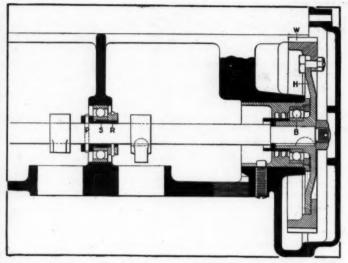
Intake camshaft showing ball bearings, B, Inside gear, W-H; also sleeve, S; ring, R; and pin, P, for mounting bearings
